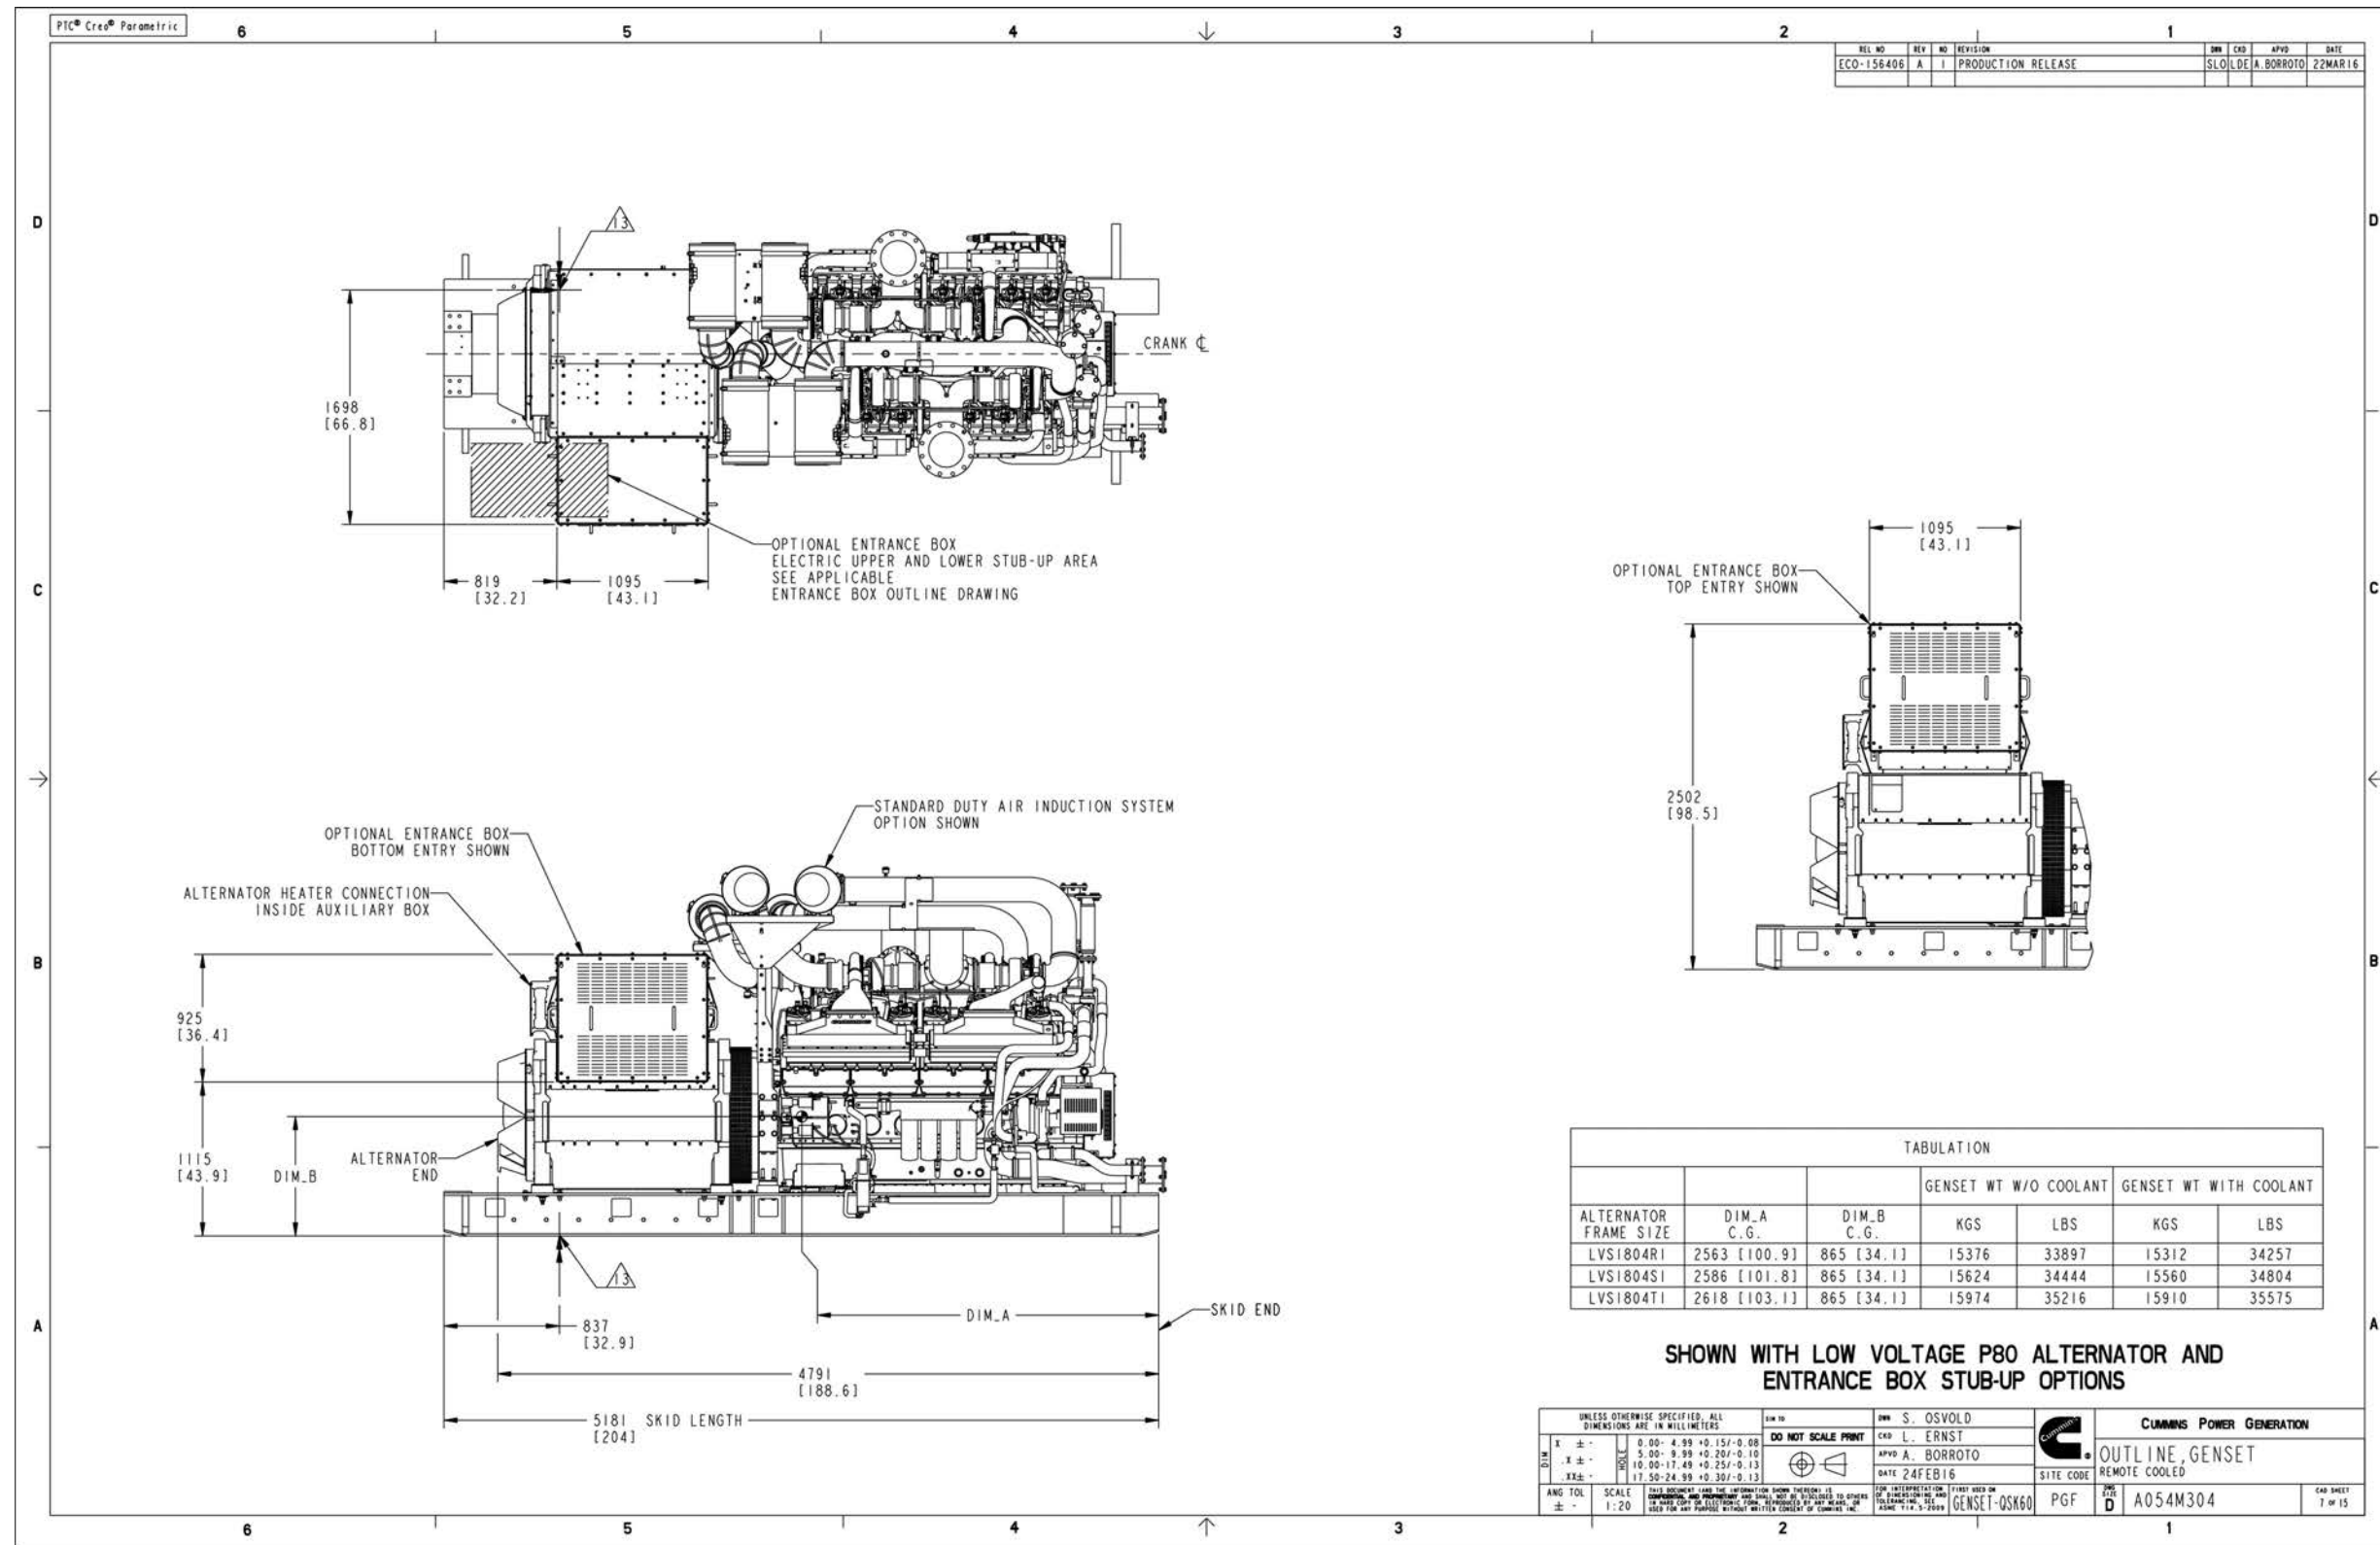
GENERATOR SET WITH REMOTE COOLING OUTLINE DRAWING (SHEET 7)
